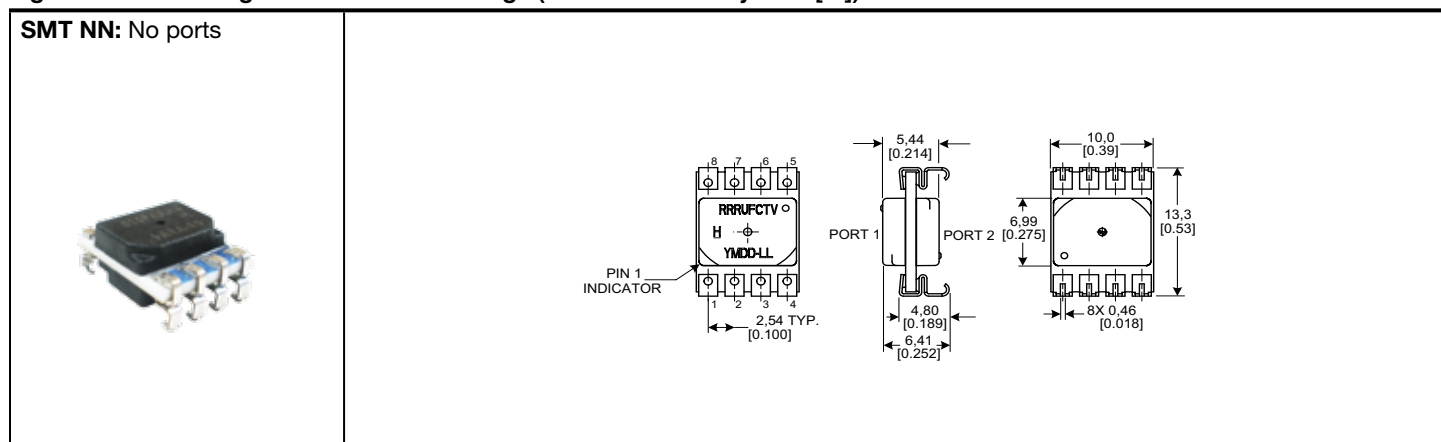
SMT Package Dimensional Drawings (For reference only: mm [in])
